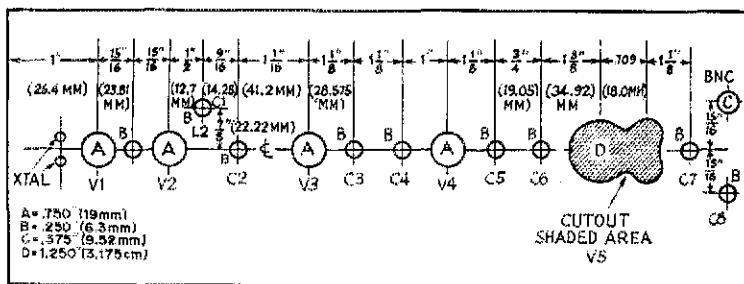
Dimensions for locating holes for tube sockets and variable capacitors. The spacing between V3, V4, and V5 is critical and should be followed closely. Double-sided pc board is used as a chassis base.
